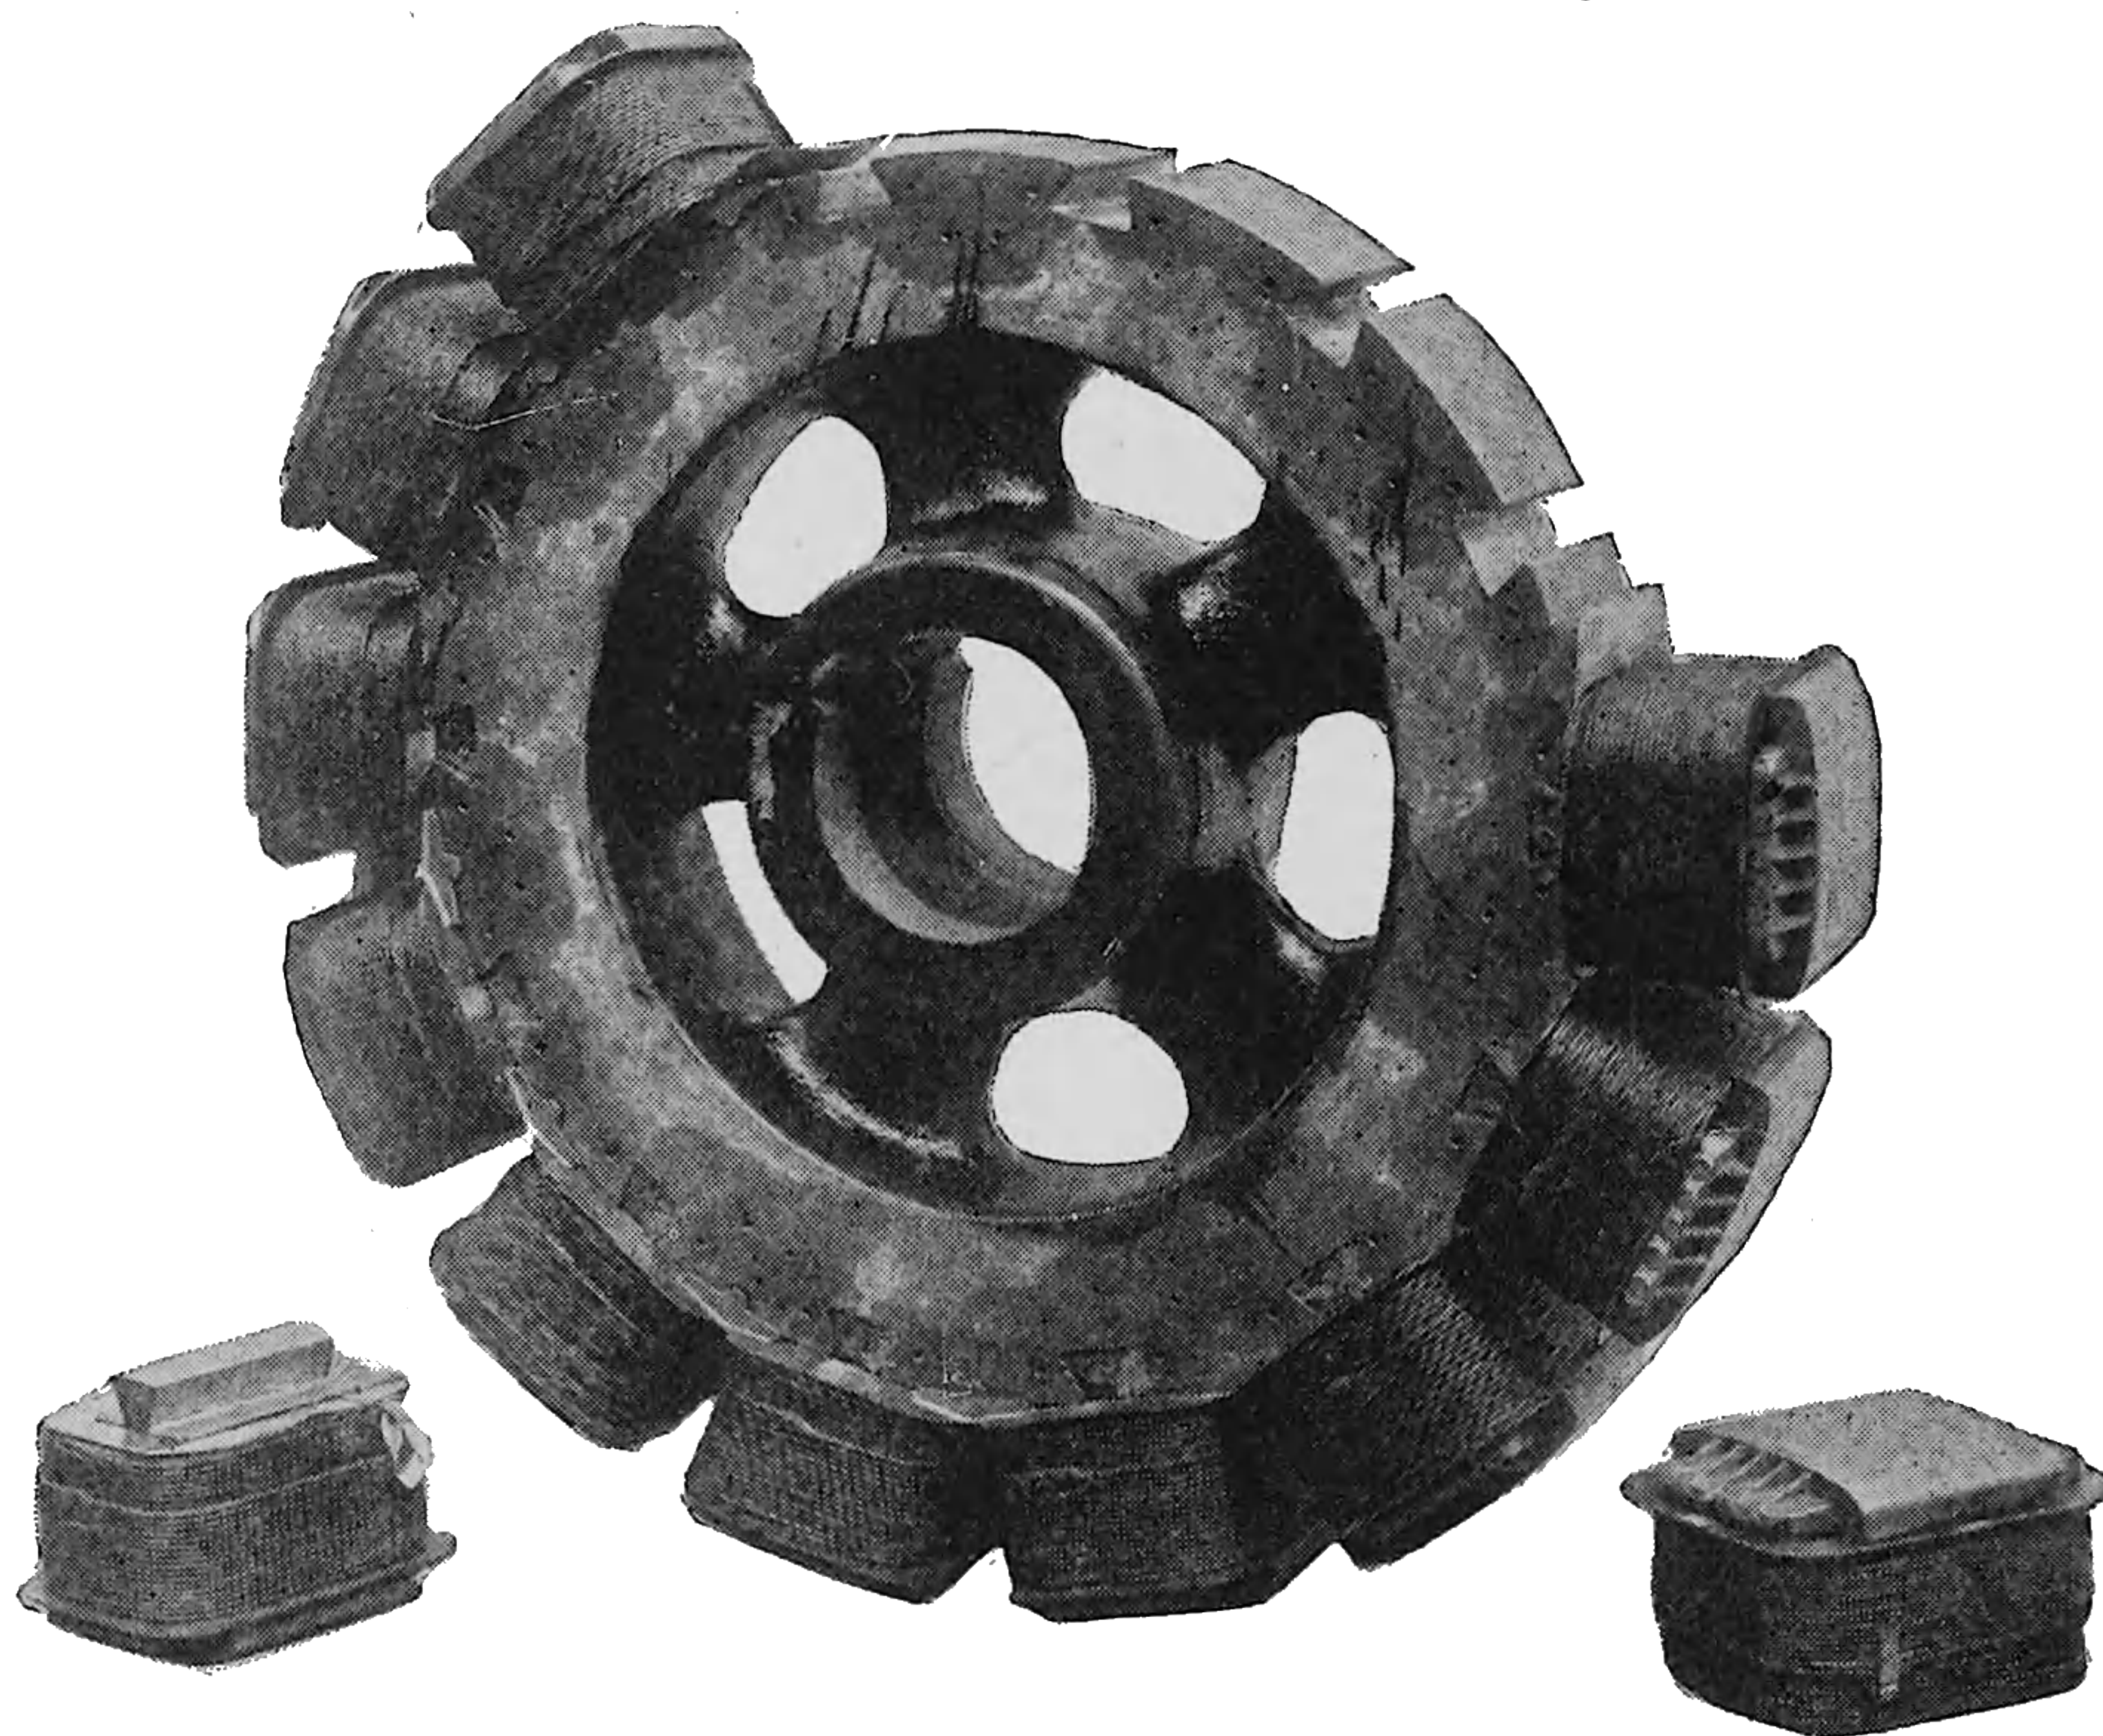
Westinghouse Rotor Construction Showing Cast Spider and Dovetailed Pole Pieces
